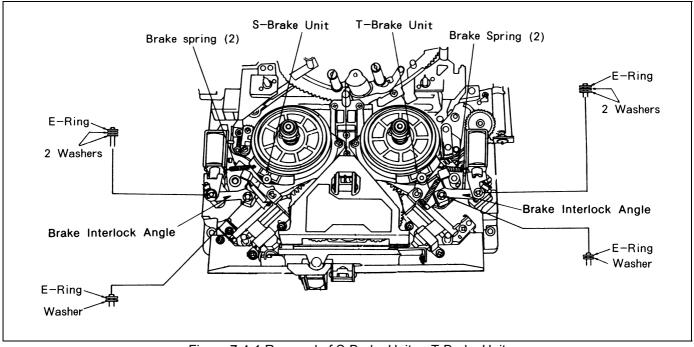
Removal of S-Brake Unit or T-Brake Unit
